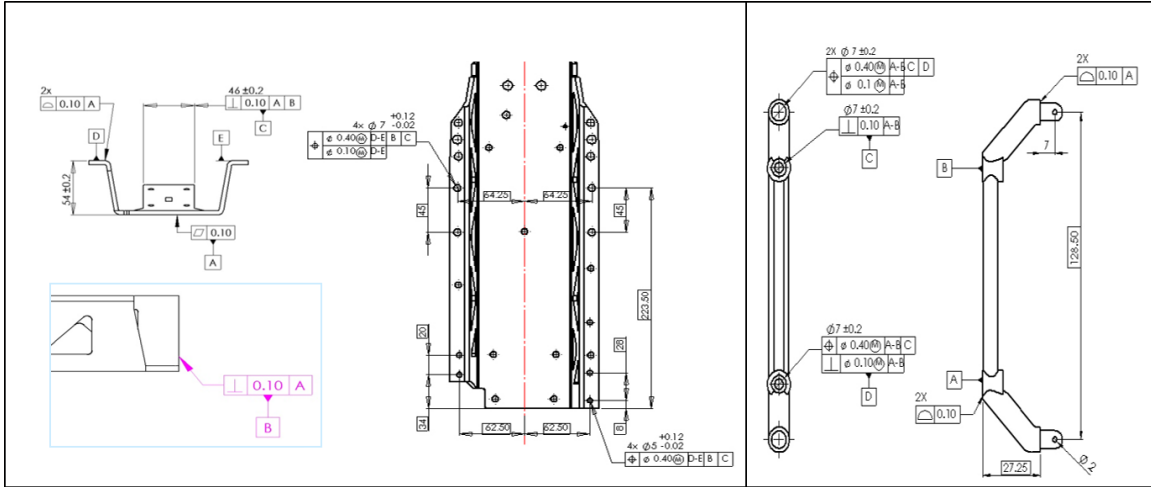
30: Improved GD&T by DAL for the chassis and roll bar sub-assembly
